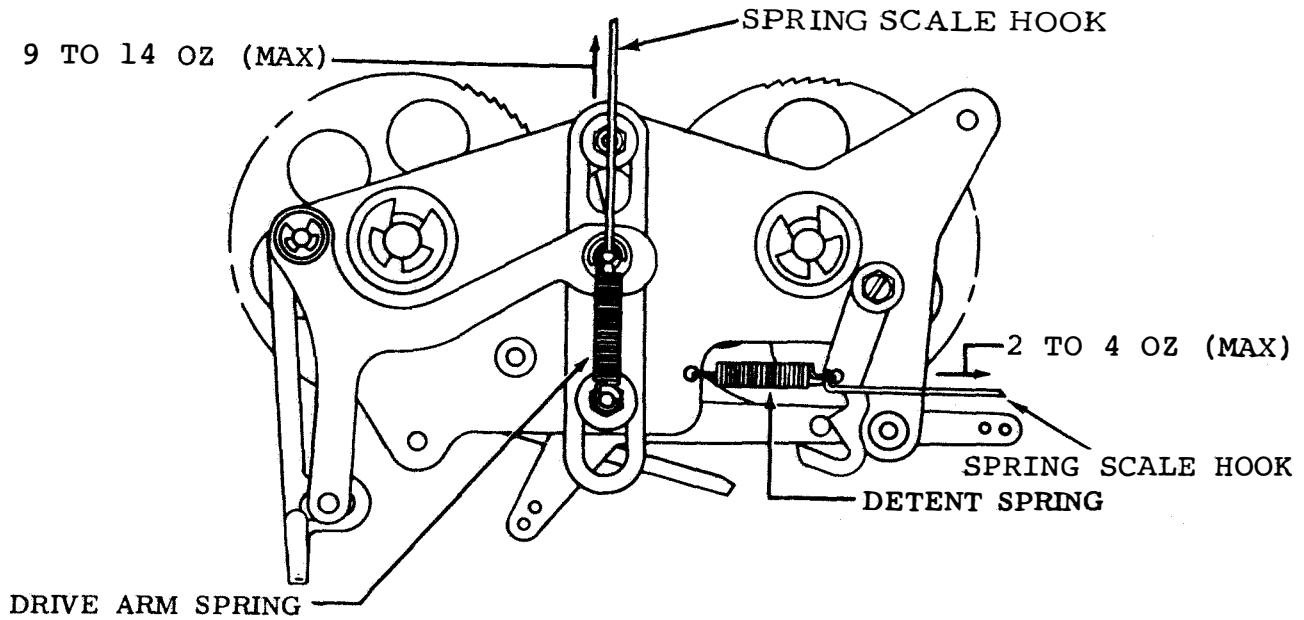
Detent Spring and Drive Arm Spring, Rear View
